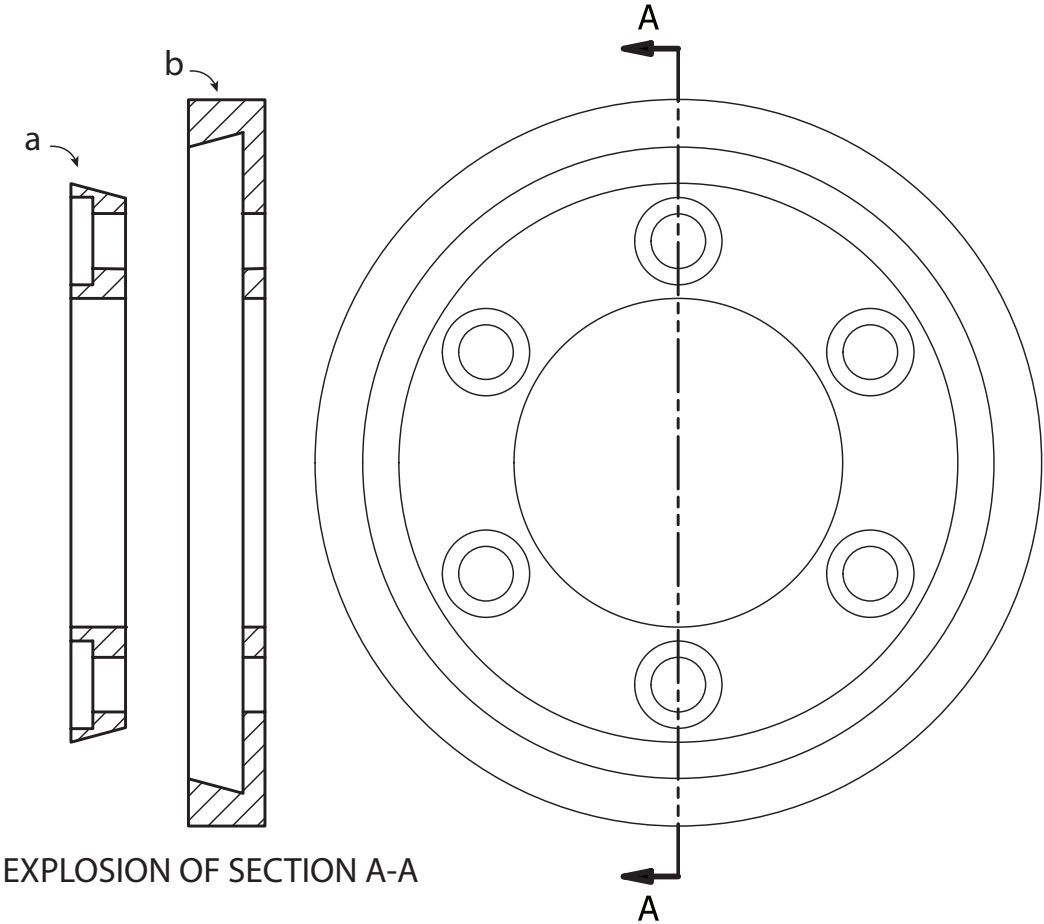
Design of disc. Labels: (a) High tensile M5 screws (b) 4mm diameter dowels (c) Grub screw to hold samples.
